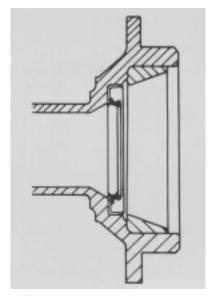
Coat outer diameter of main drive bearing cap oil seal with Loctite 510. Press seal into drive gear bearing cap with lip of seal up. Install main drive gear taper bearing cup in bearing cap.
